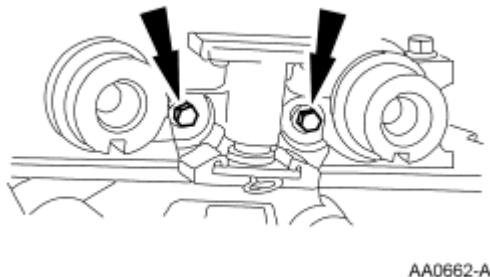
Locating Secondary Timing Chain Tensioner Bolts
